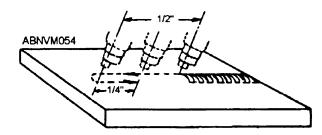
Reciprocating technique for GMA welding.
